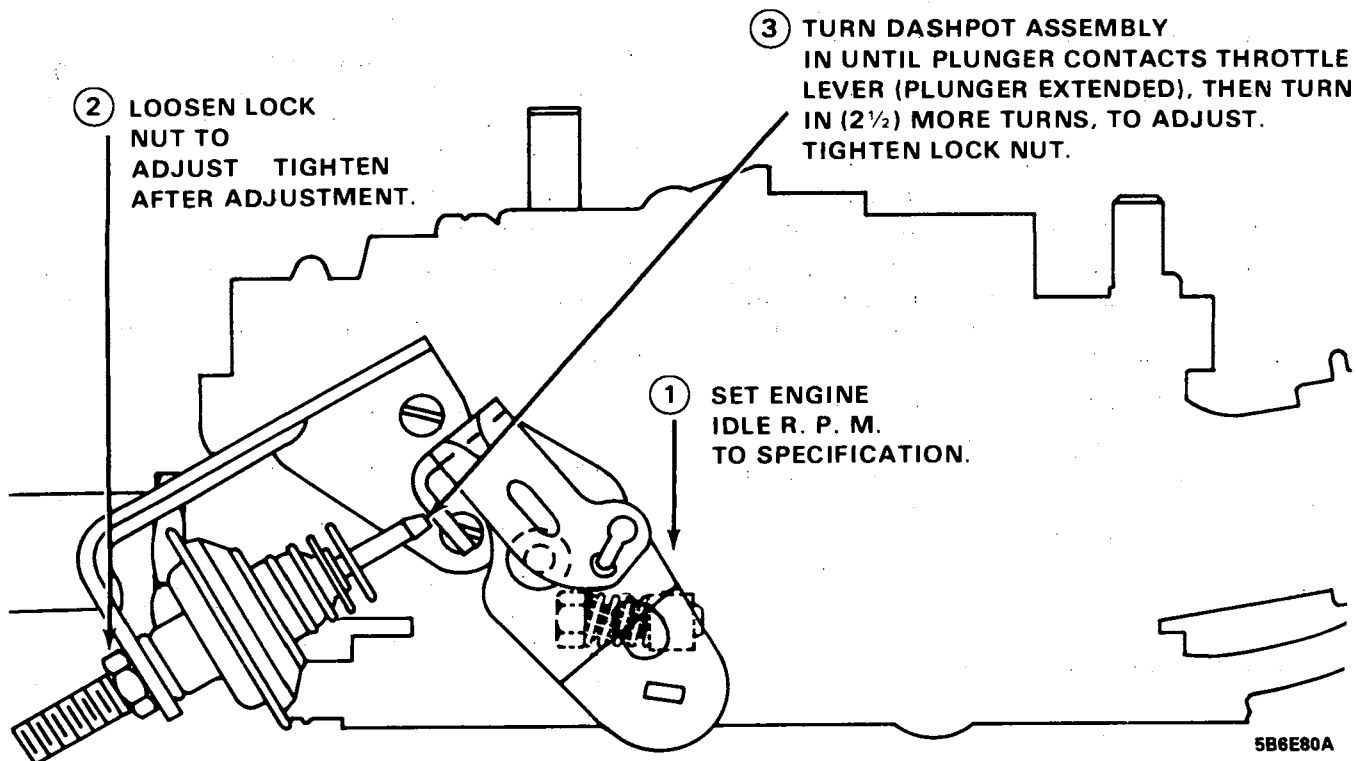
E-80A - Throttle Closing Dashpot Adjustment
